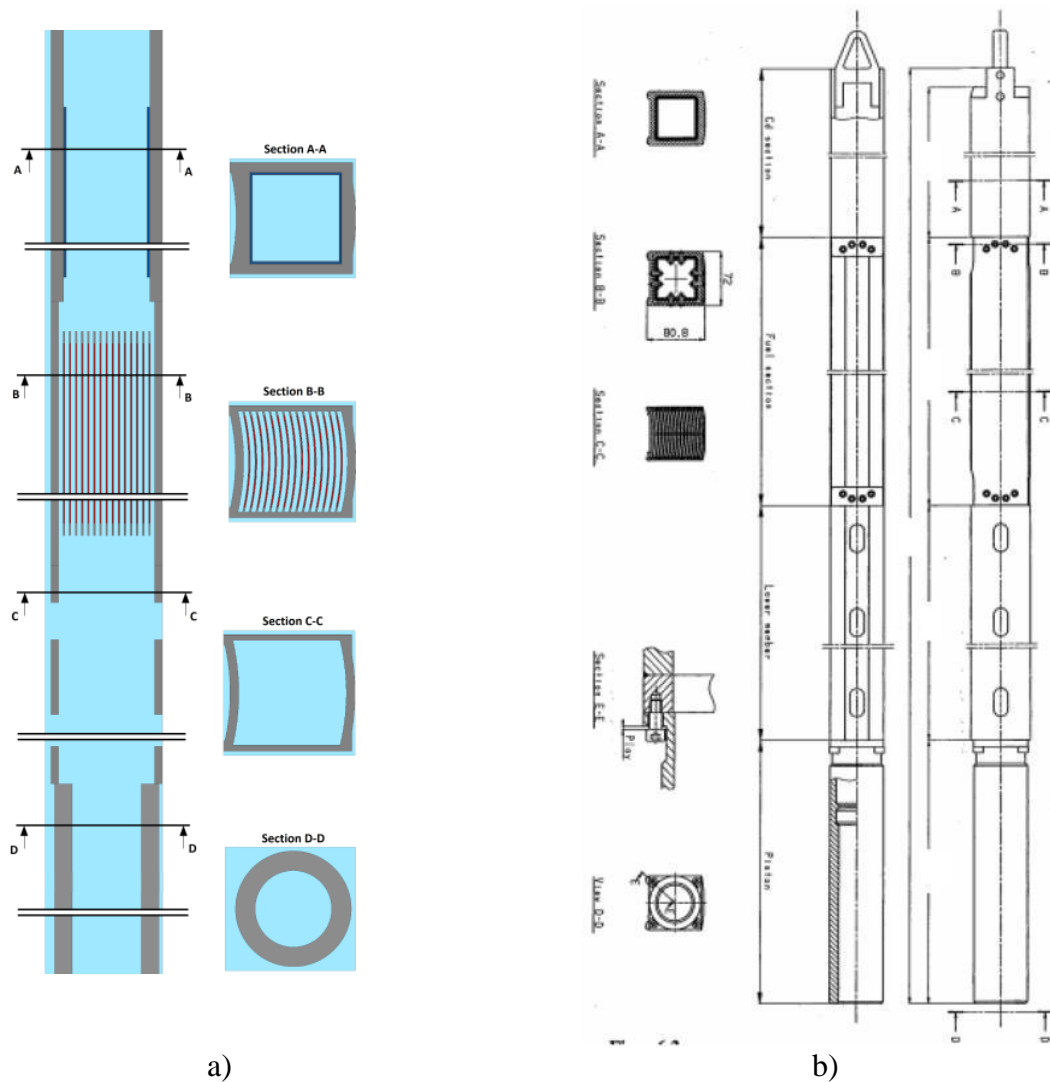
CF and CA fuel assembly type: a) Serpent model; b) CAD drawing from specifications
